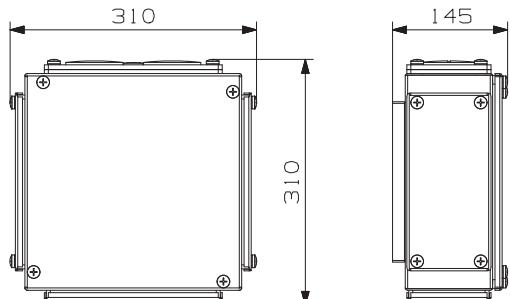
Motor sizes 160 VN, standard design with 3 terminals
